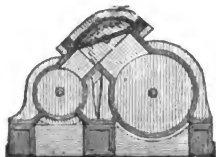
Horizontal Compound Engine. Section of Cylinders.
